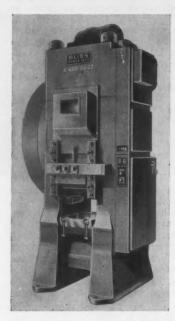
Bliss knuckle-joint coining press with wedge type slide adjustment
